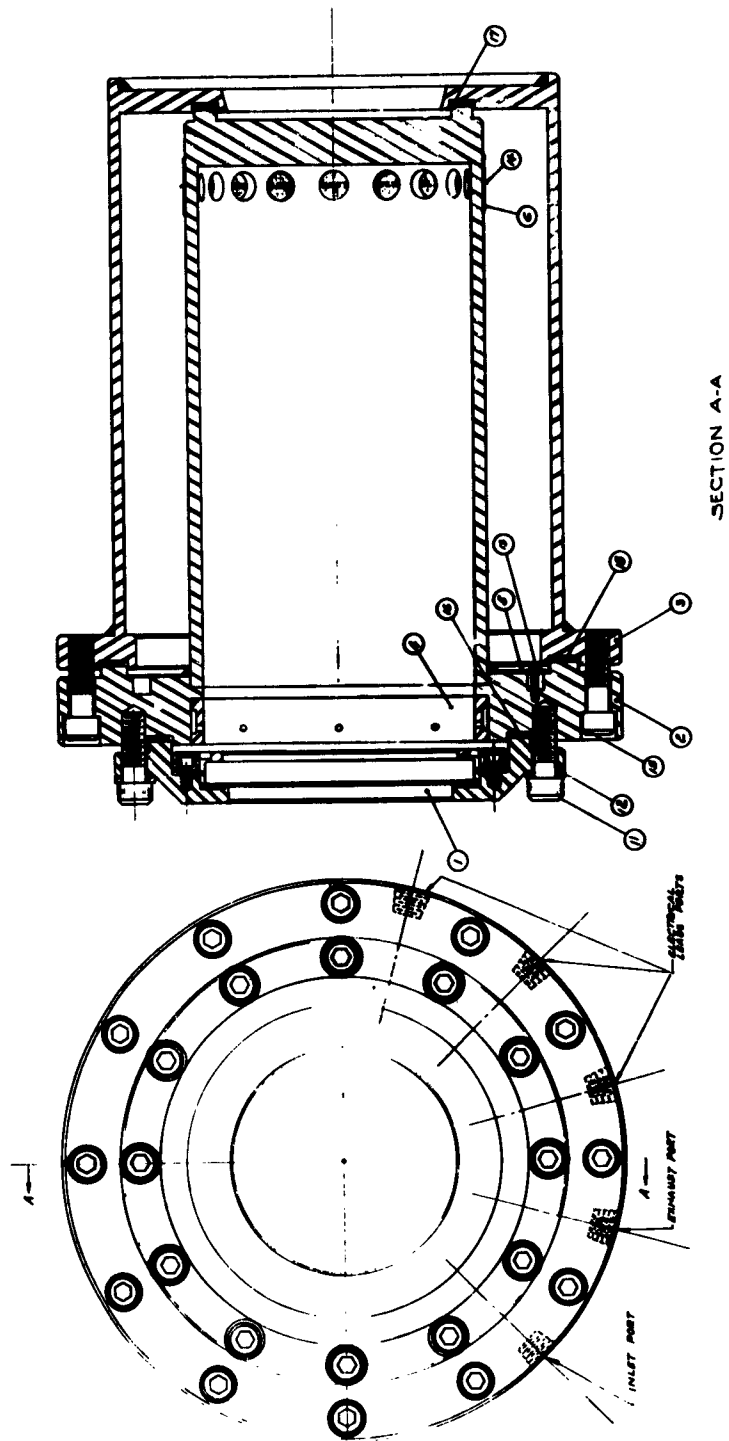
DETAIL ASSEMBLY DRAWING FOR EXPERIMENTAL WASTE DISPOSAL UNIT
